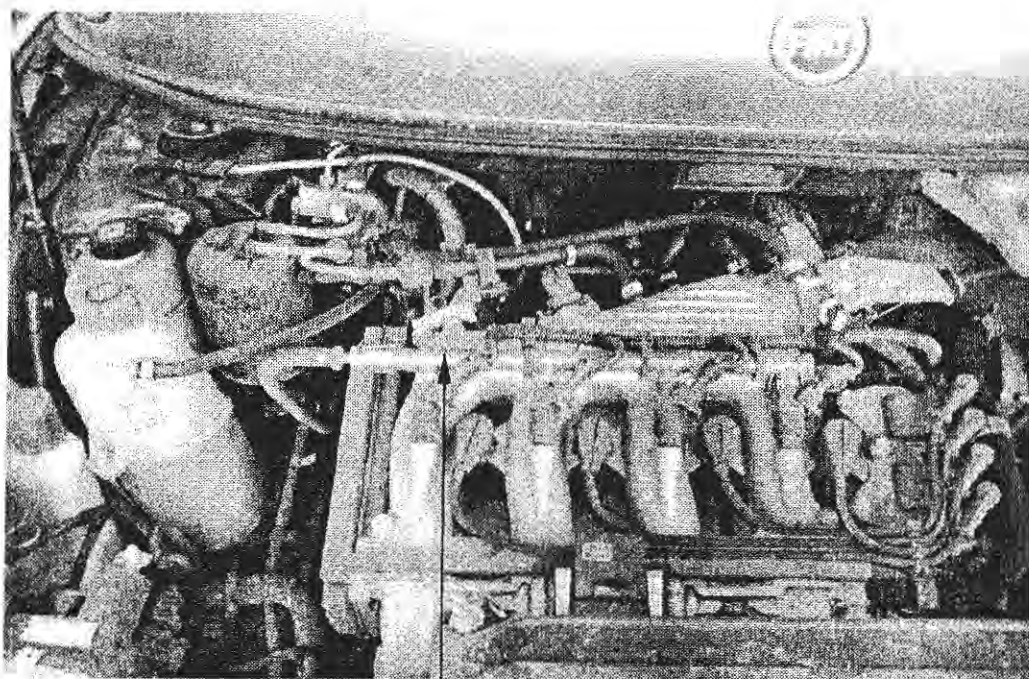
Layout system CNG elements in engine chamber car Peugeot Partner: (1) terminal fuelling, (2) reducer, (3) variable-speed transmission unit, (4) emulator, (5) control room
